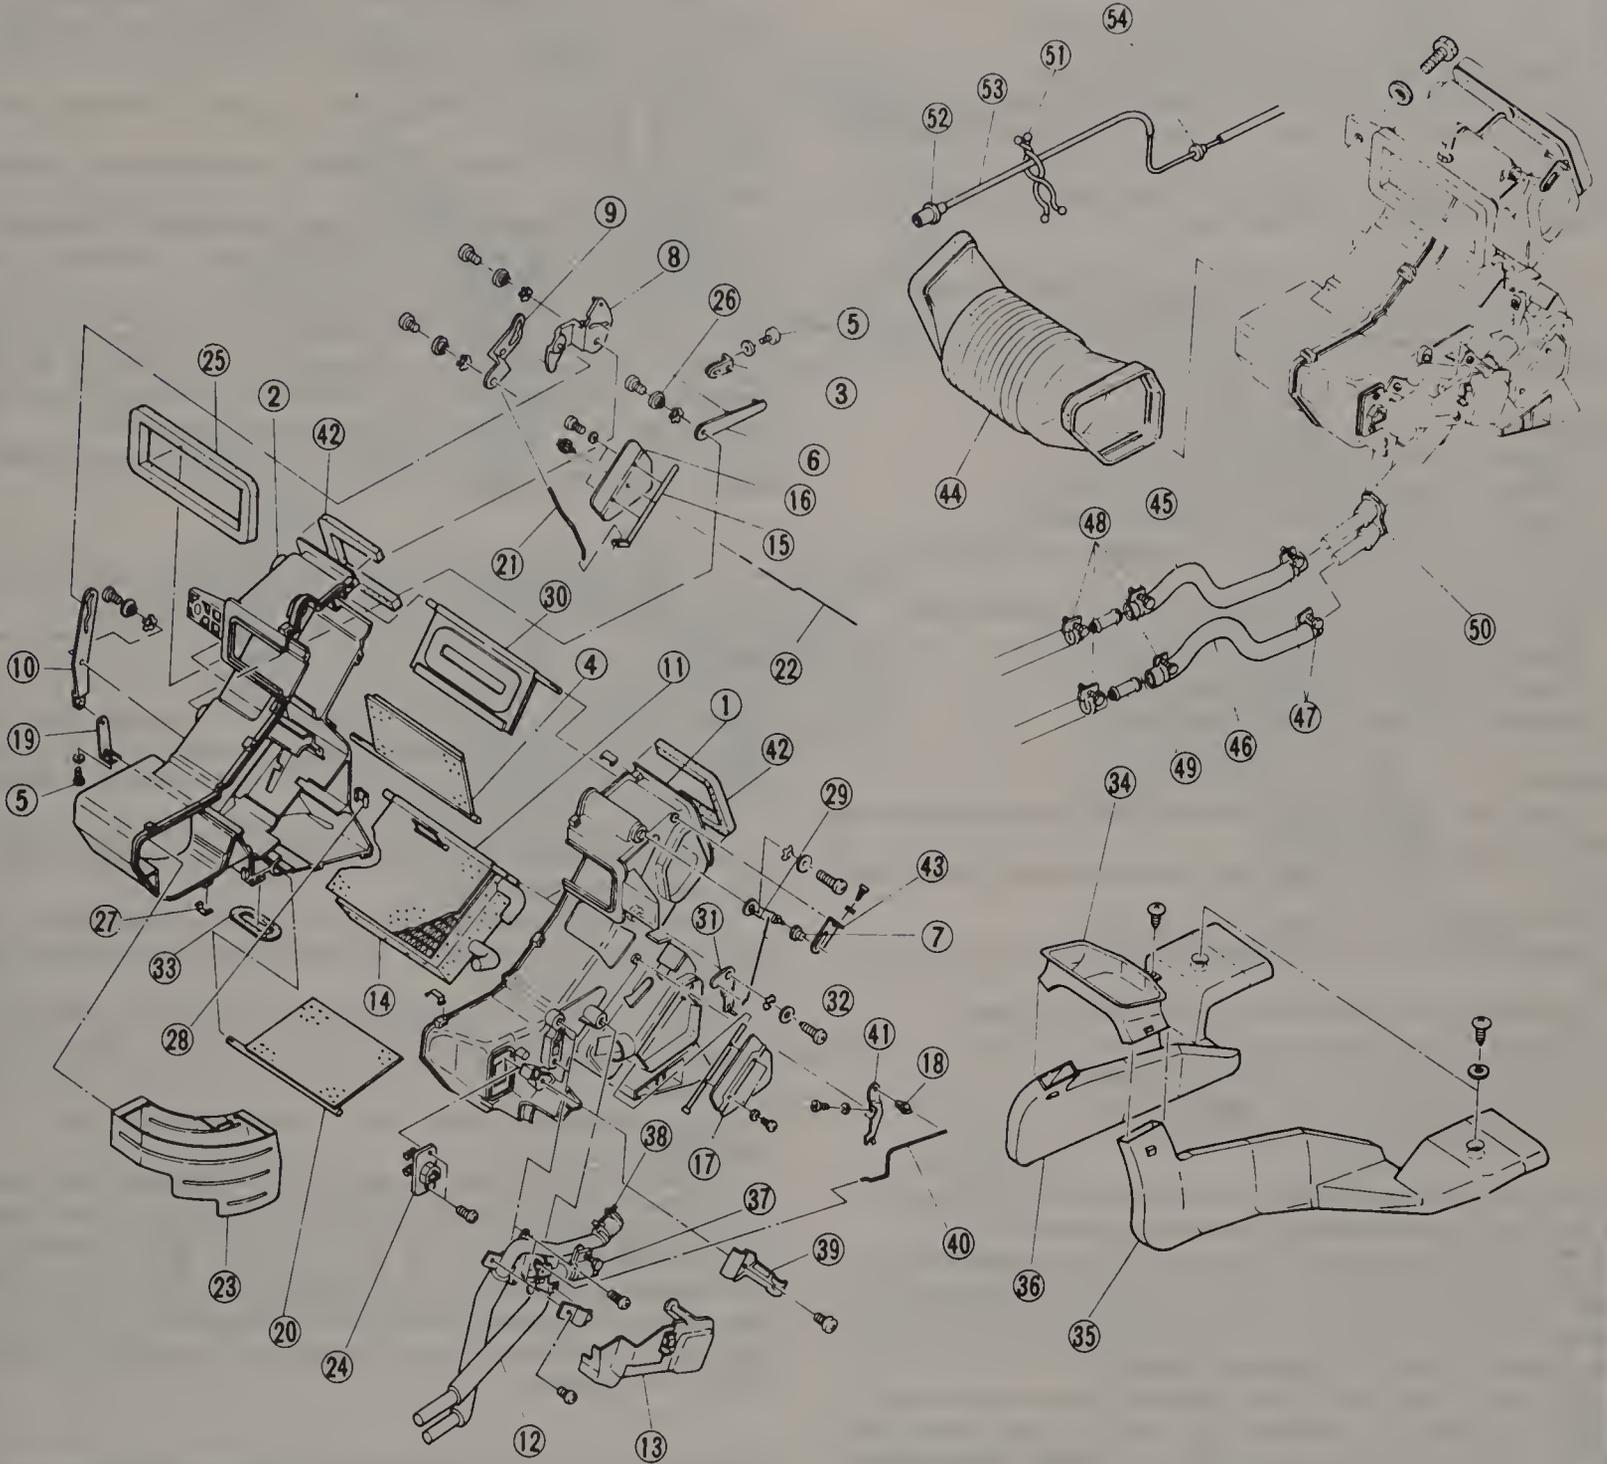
Heater unit and duct components – exploded view (Sec 8)
